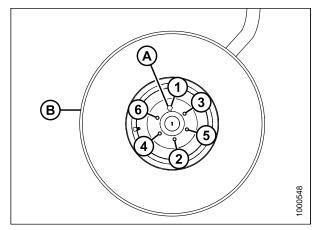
Formed Caster Wheel Nut Tightening Sequence
